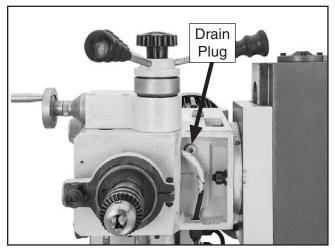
Location of headstock drain plug (headstock tilted 90° for clarity).
